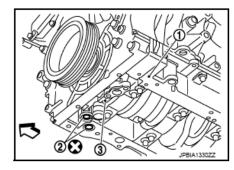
Identifying O-Rings On Bottom Of Lower Cylinder Block And Oil Pump Courtesy of NISSAN MOTOR CO., U.S.A.
